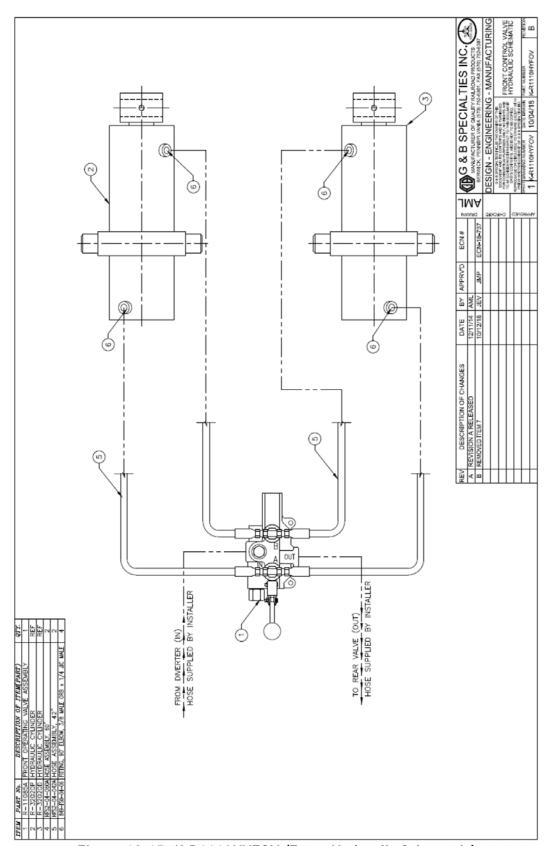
K-R1110HYFOV (Front Hydraulic Schematic)
